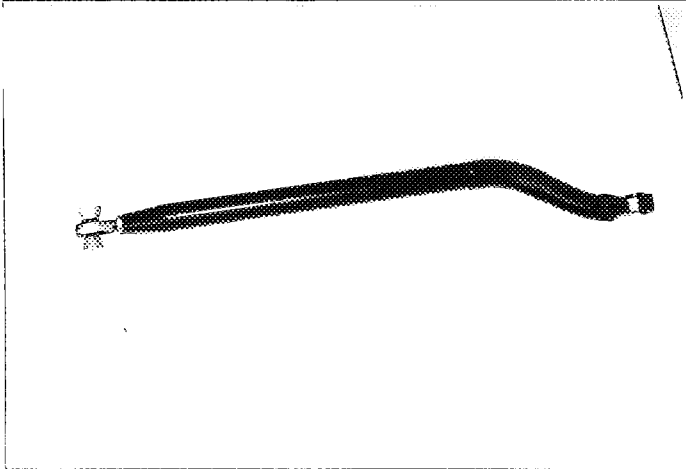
ADJUSTABLE STABILIZER ASSEMBLY
